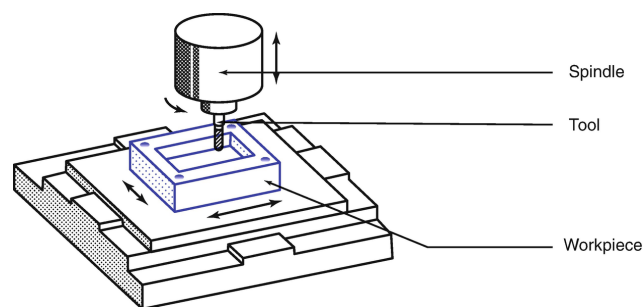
Milling machine concept. A spinning bur cuts a block that is hold still in a baseplate⁴¹
